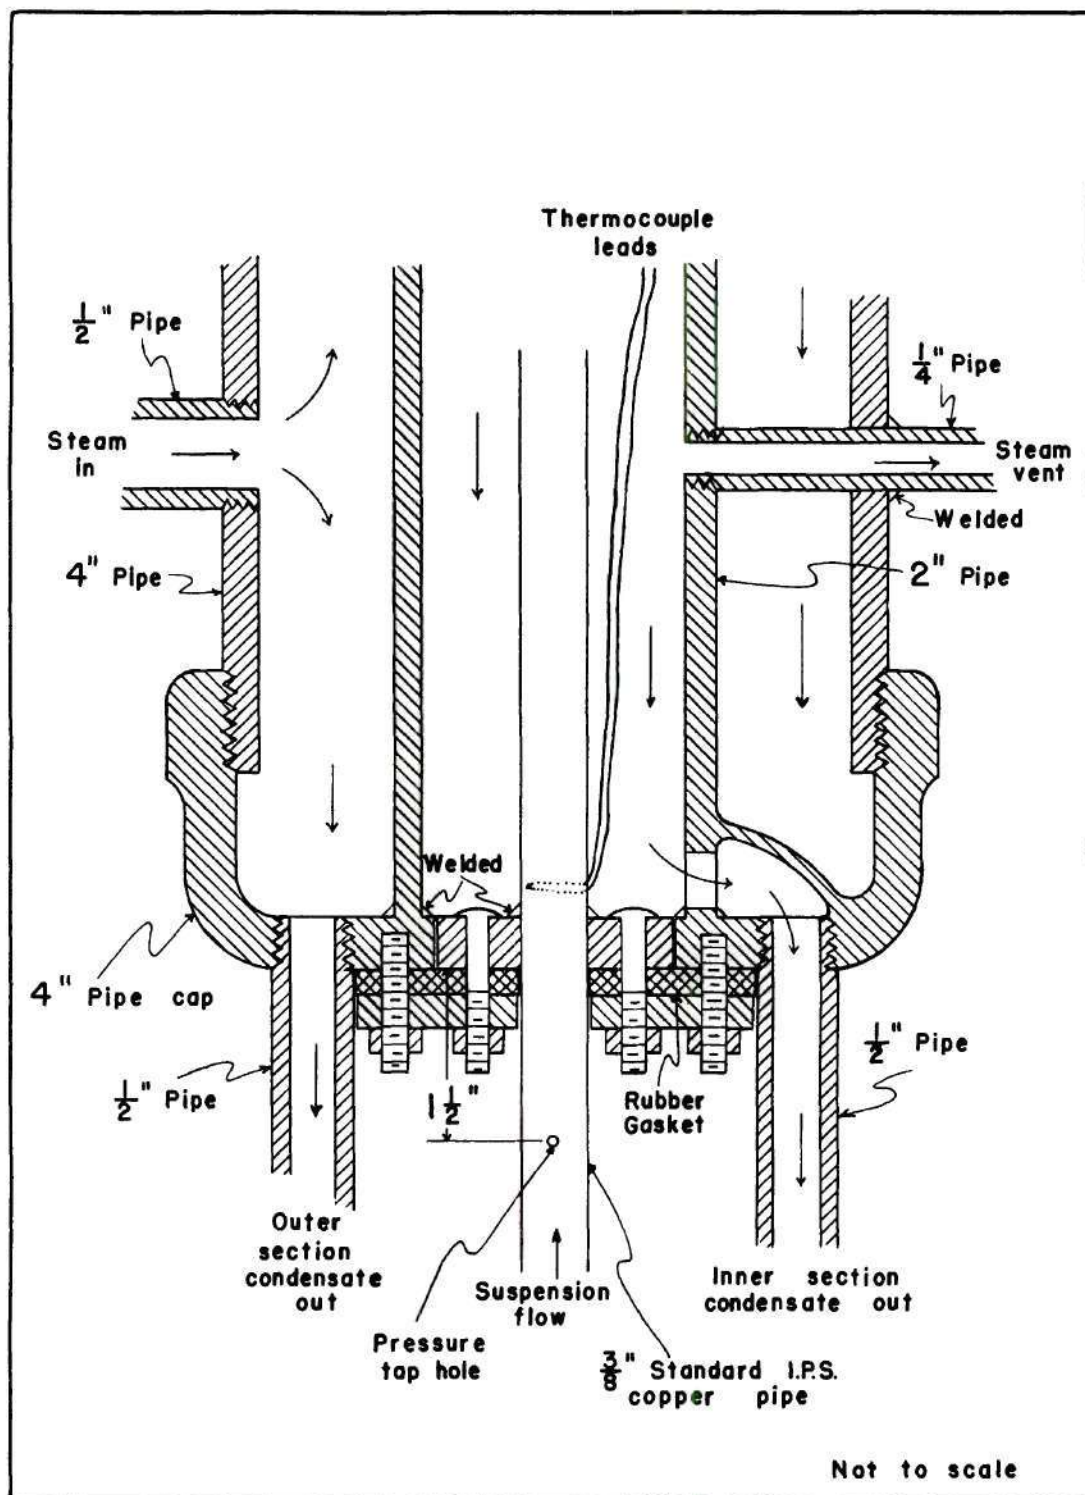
Details of Construction of Lower End of Heat Transfer Apparatus.
